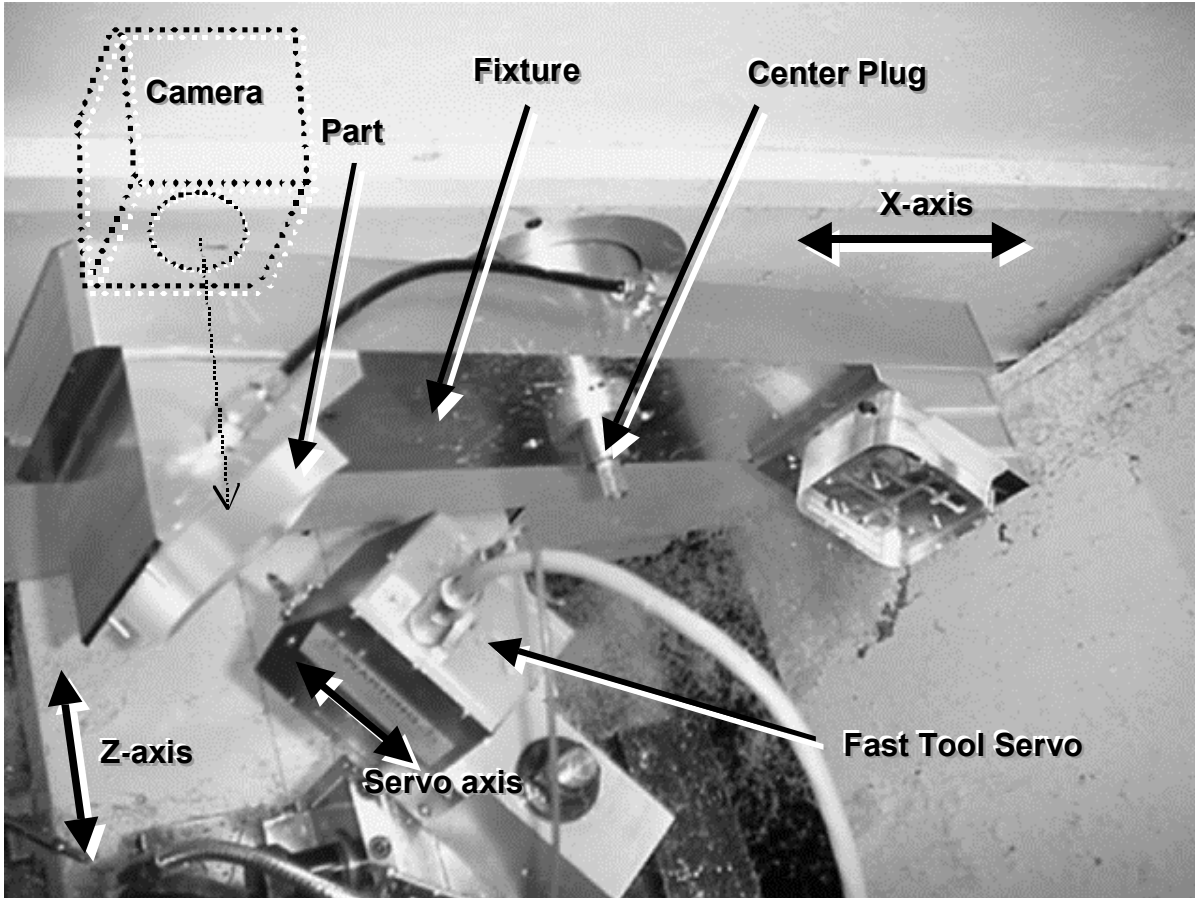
Machine setup. PMMA test blanks are mounted on the vacuum pedestals. The alignment camera is behind the splash shield.
